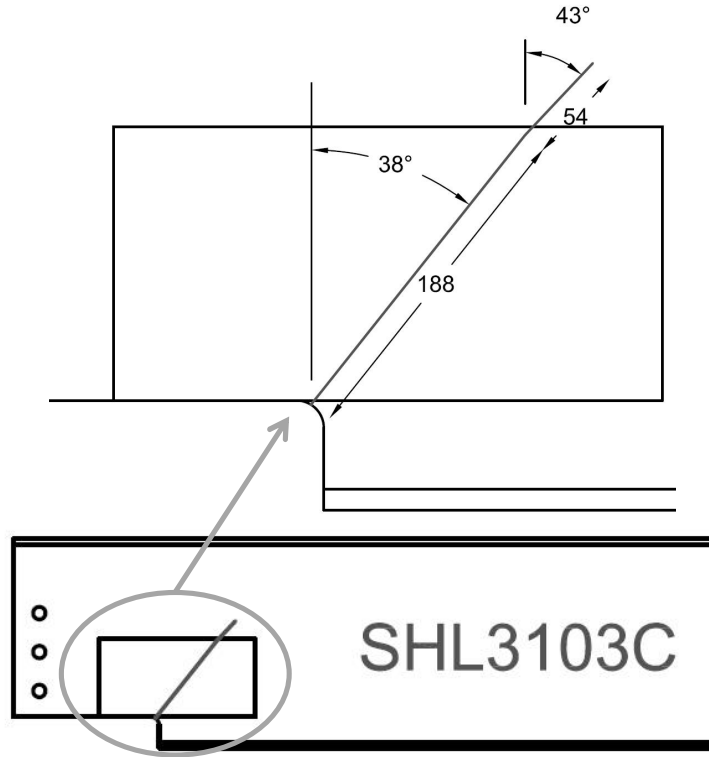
Crack angle detail for single sided three layer longitudinal repair
